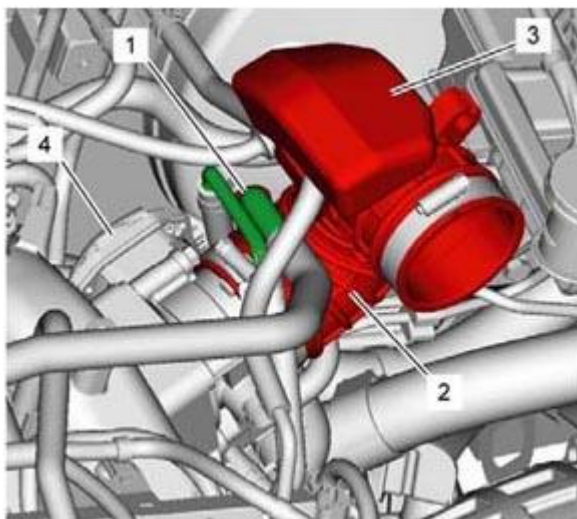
Identifying Air Cleaner Replacement Components
